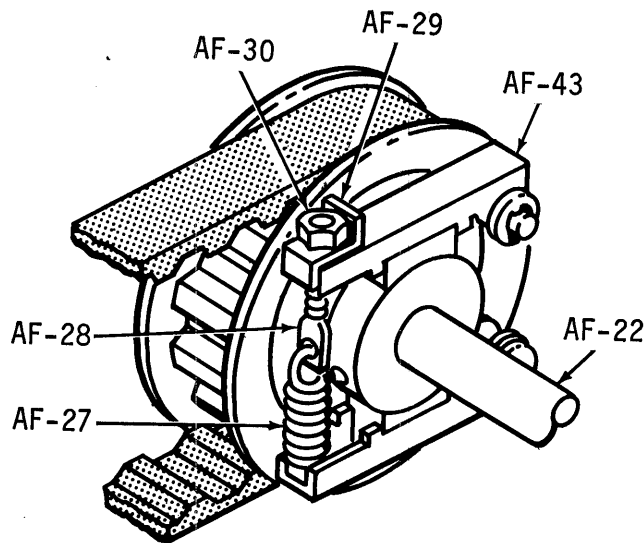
TORQUE LIMITING DEVICE (BRAKE)
